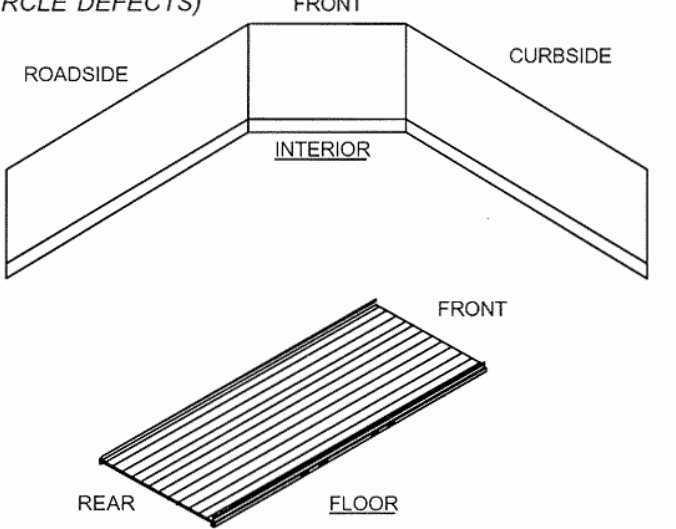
Open Top Container Inspection Checklist (Cont'd)
